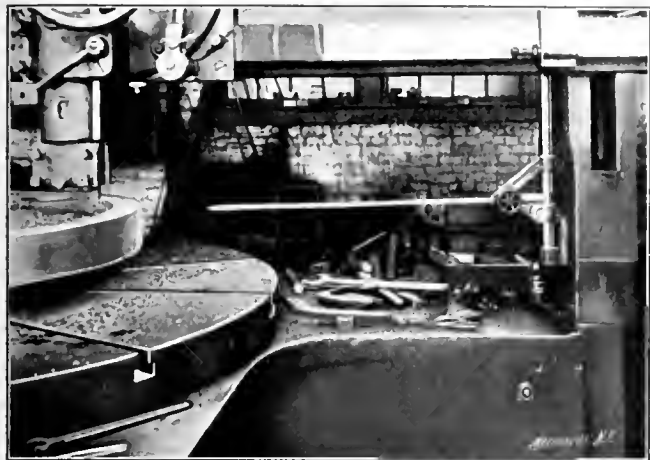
Device for Measuring Circular Work on the Boring Mill
